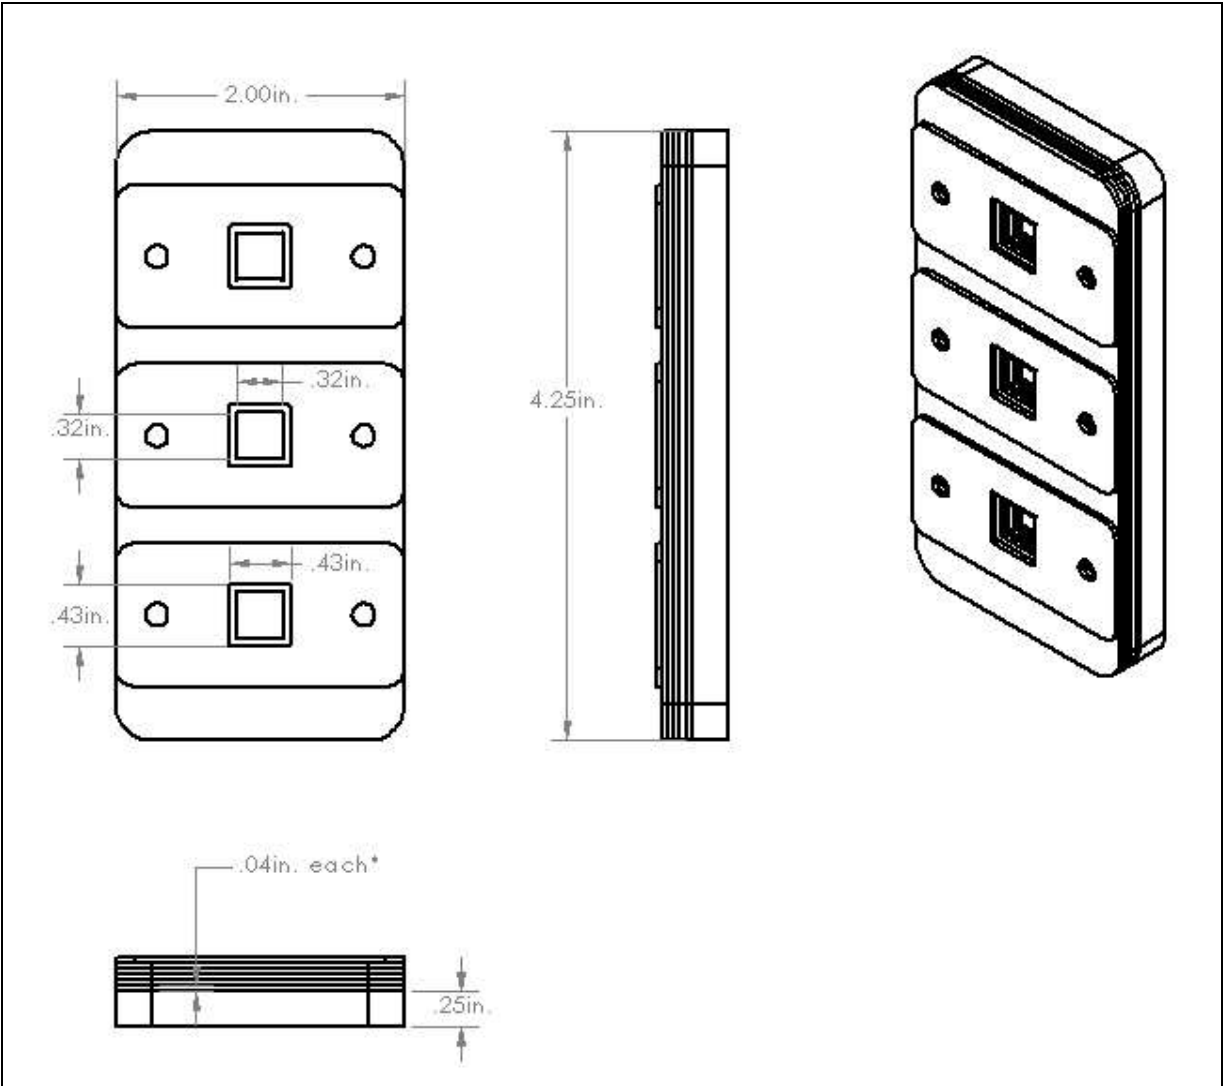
Multiple views of the fixture designed to hold three thermoelectric stacks, shaped to fit into TSRL's APS substrate holder.
